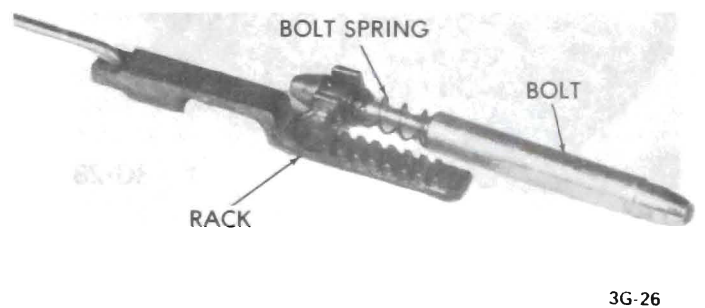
G-46 - Assembling Bolt to Rack Cross-Over Arm
